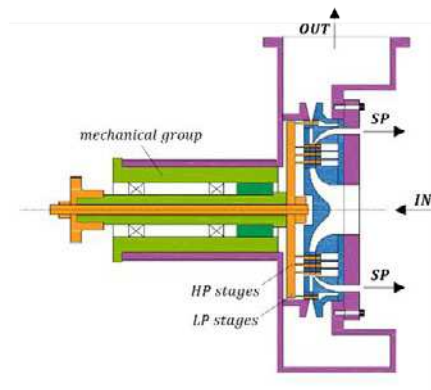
ROT sectional drawing for two-pressure level CEP. IN = Working fluid inlet; SP = Spillage point, to HP condenser; OUT = Turbine discharge, working fluid outlet to LP condenser.
